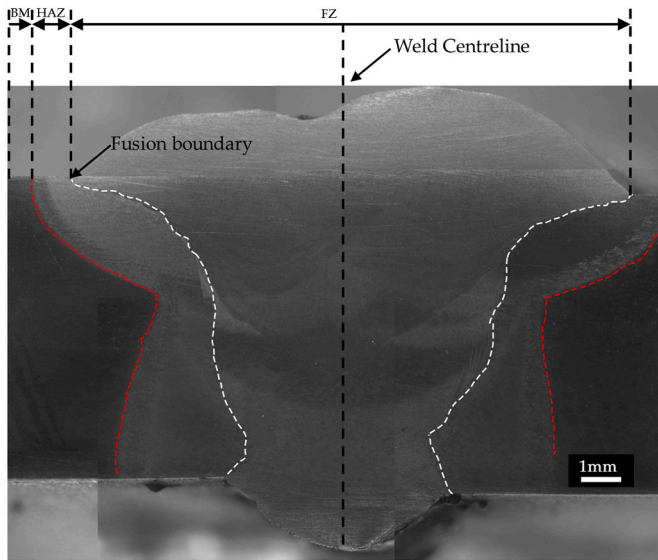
Optical micrographs showing an overall view of the cross-section of the GMAW weldments.
